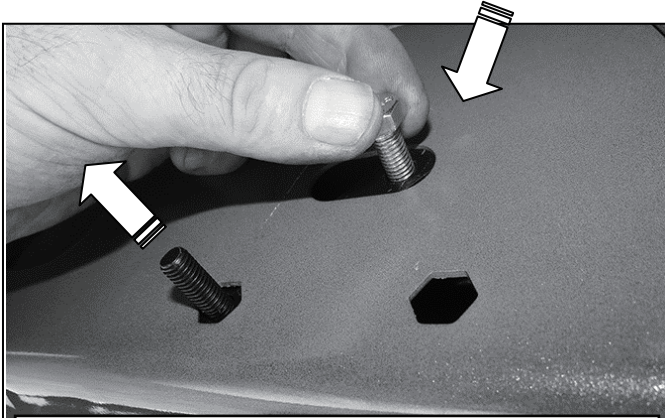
8mm Bolt-Nut Plate, NOTE: 8mm Bolt-Nut Plate is not required on models with threaded inserts
